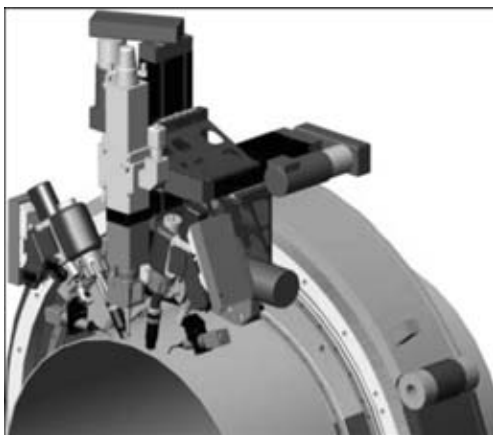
Design for the further development of equipment for hybrid welding of pipe joints
